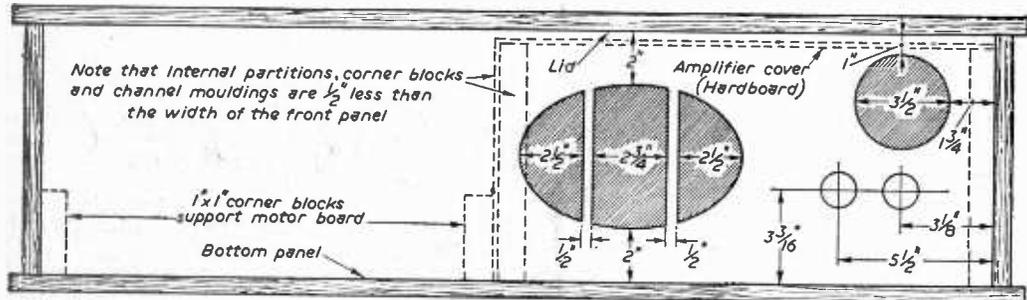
The front panel showing the cut-outs required for the loudspeakers and control knobs.
